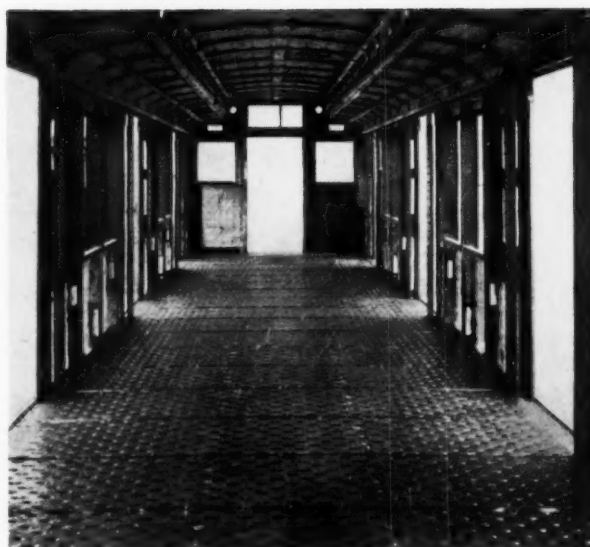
TRUSS-PLATE FLOOR CONSTRUCTION—SALAMANDER INSULATION IN PLACE
